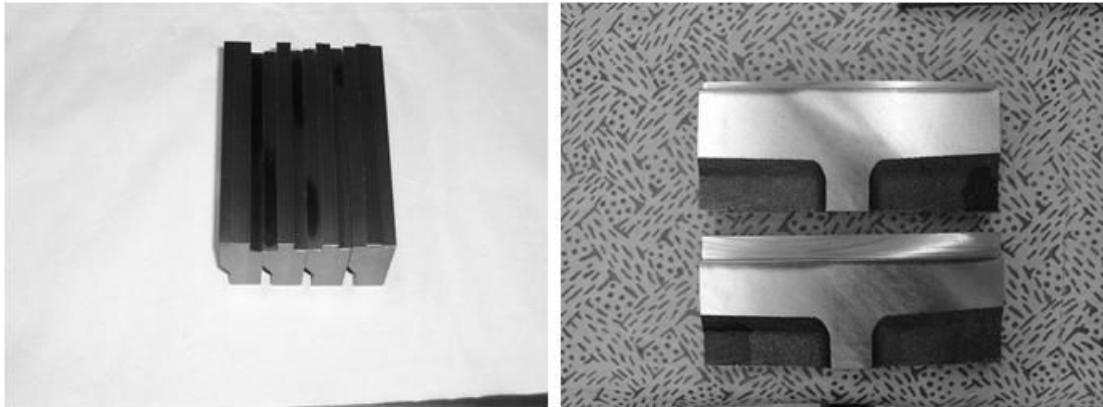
Photographs of typical SGCI samples in the as used condition noting dark surface marks indicating grinding burn
